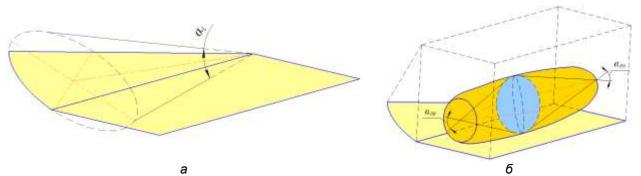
To the definition of design features of the exciting blade α_L – the angle at the top of the cone forming the curved part of the blade; a – curved and rectangular parts of the blade Assembly; 6 – the scheme of the blade with a corn cob located on it
